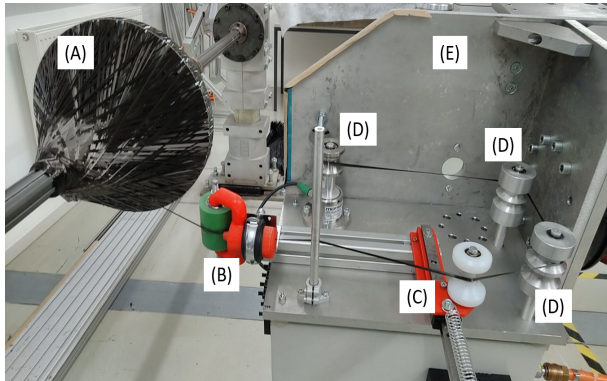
Fiber guidance in a robotic filament winding head for the continuous winding of a conical structure with: winding mandrel (A), pull-out eye (B), tensioning unit (C), guiding rollers (D), and winding head (E).
